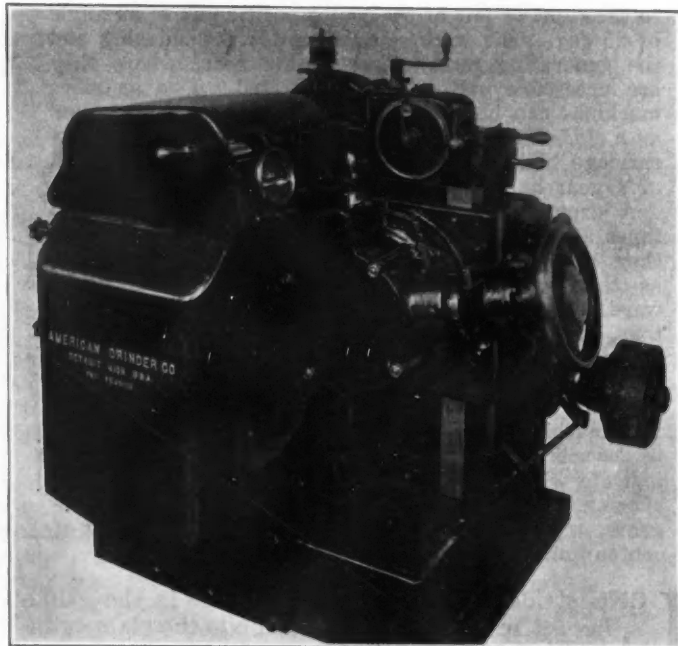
THREE-QUARTER VIEW OF THE GRINDING MACHINE
